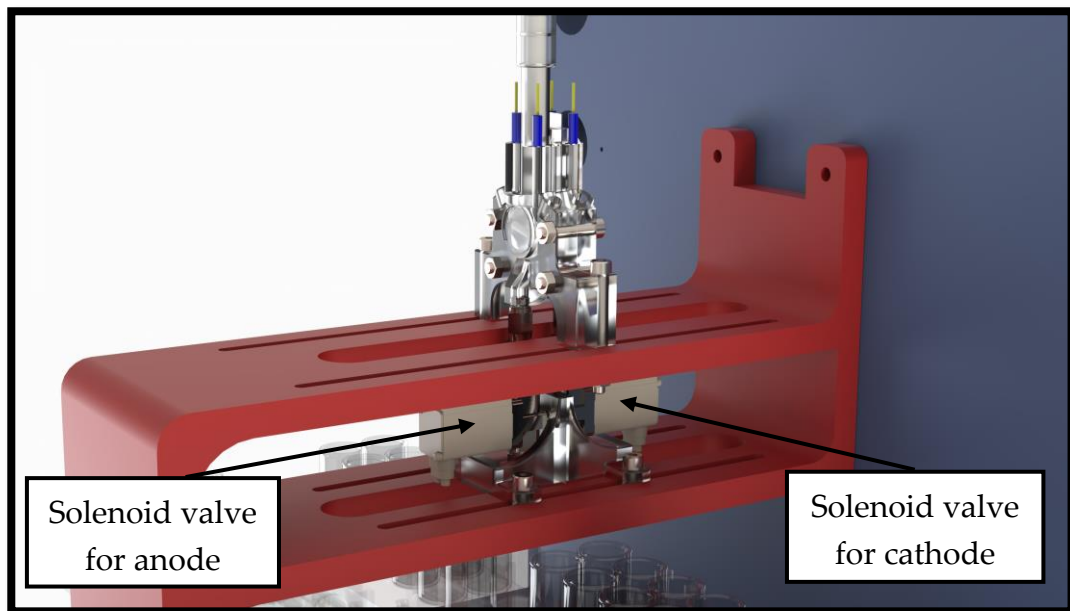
3D render view with the solenoid valves at the bottom of the reactor.
